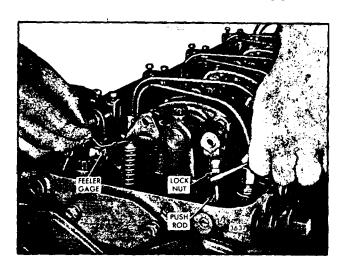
Adjusting Valve Clearance (Four-Valve Cylinder Head)
